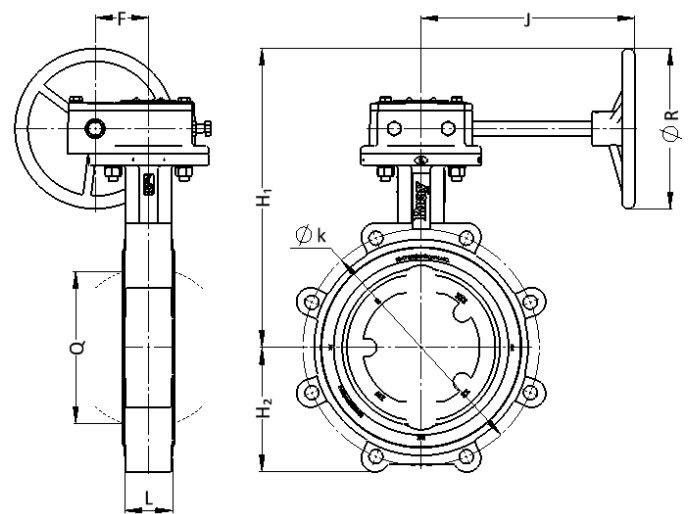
Example schematic: Butterfly Valve, lug-type with worm gear
